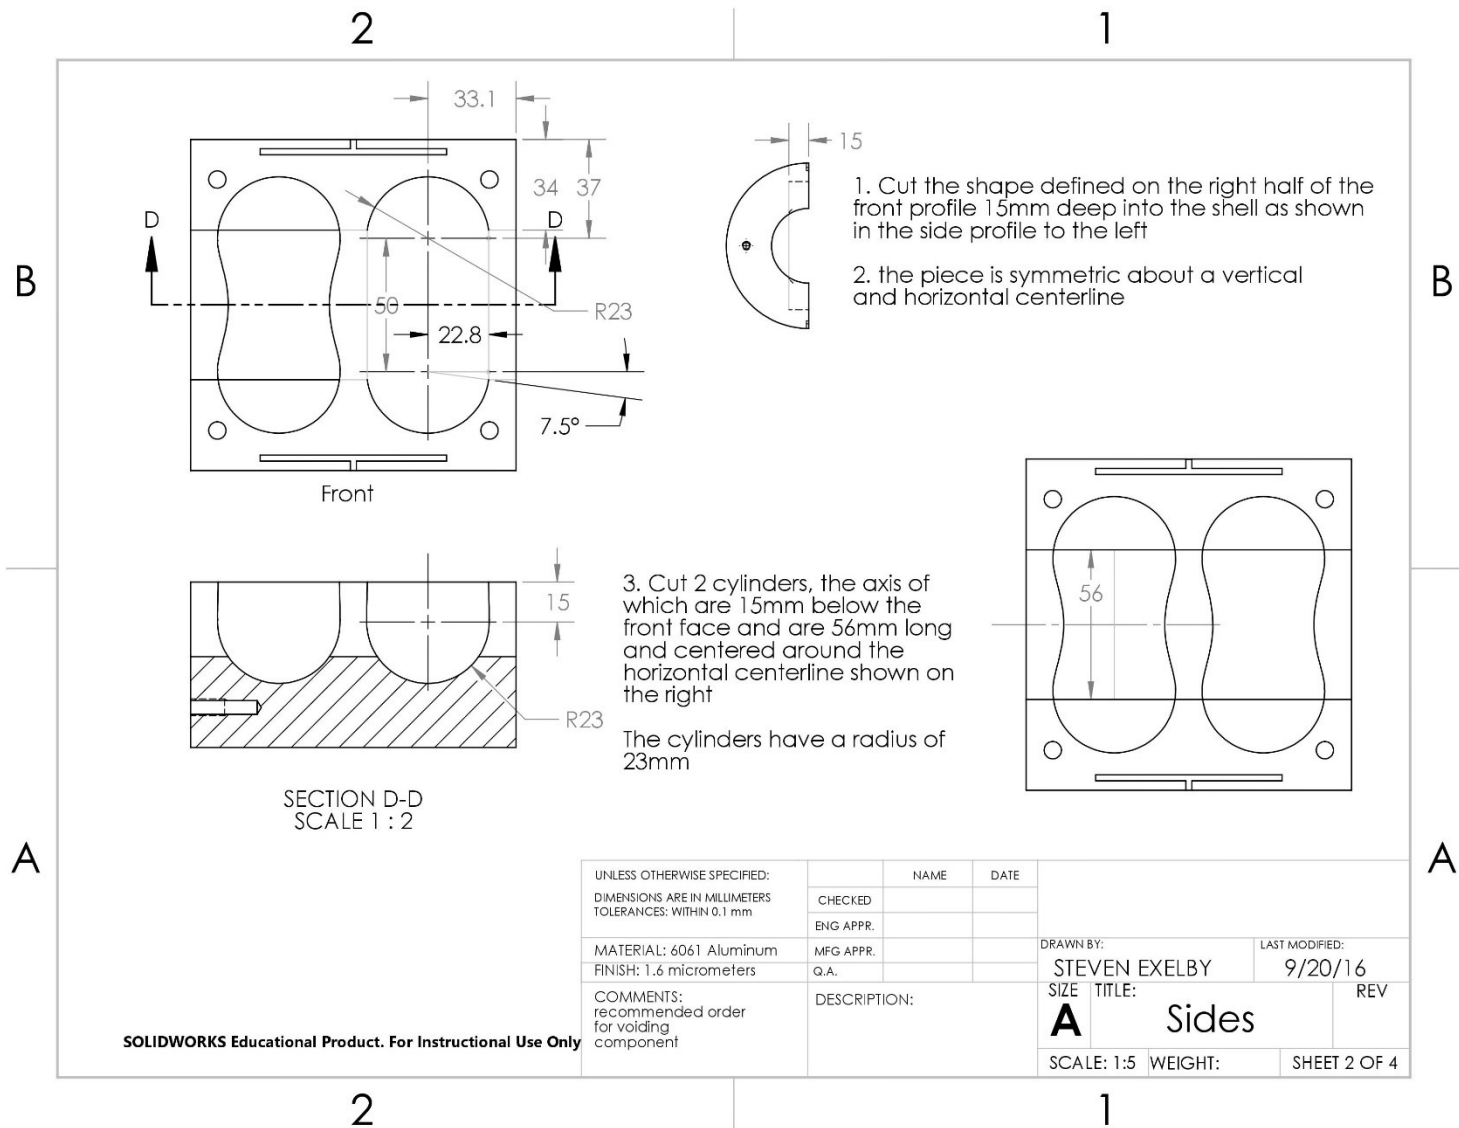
Cylindrical side pieces of the RPCFA inner housing, page 2.
